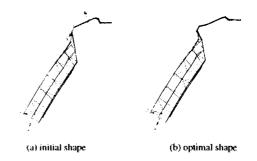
Design change of B-pillar to roof joint (Reinforcement panel).
